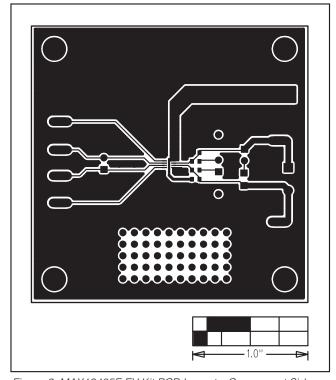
MAX13485E EV Kit PCB Layout—Component Side
